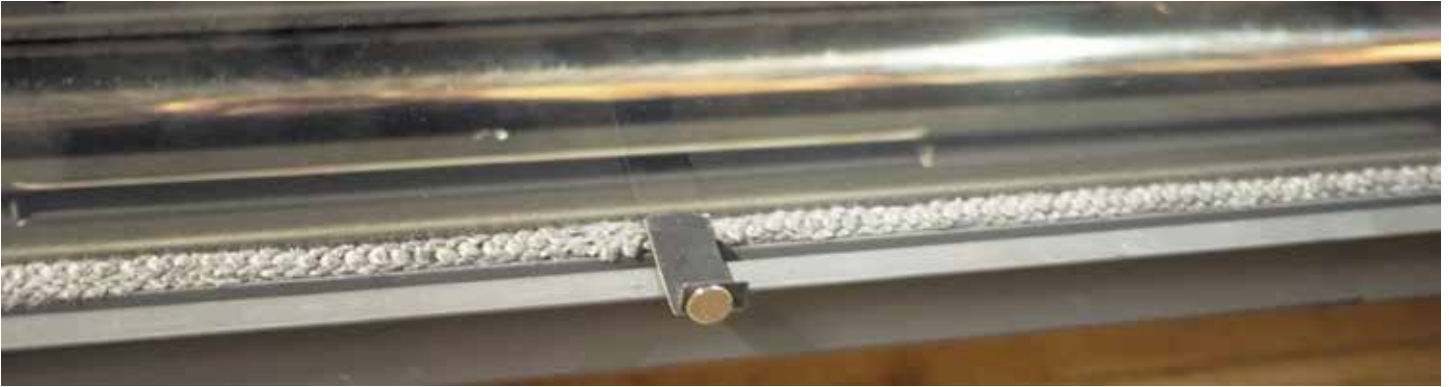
Place single magnet on bottom return flange 12" from the left end corner, right end corner, and the center.
